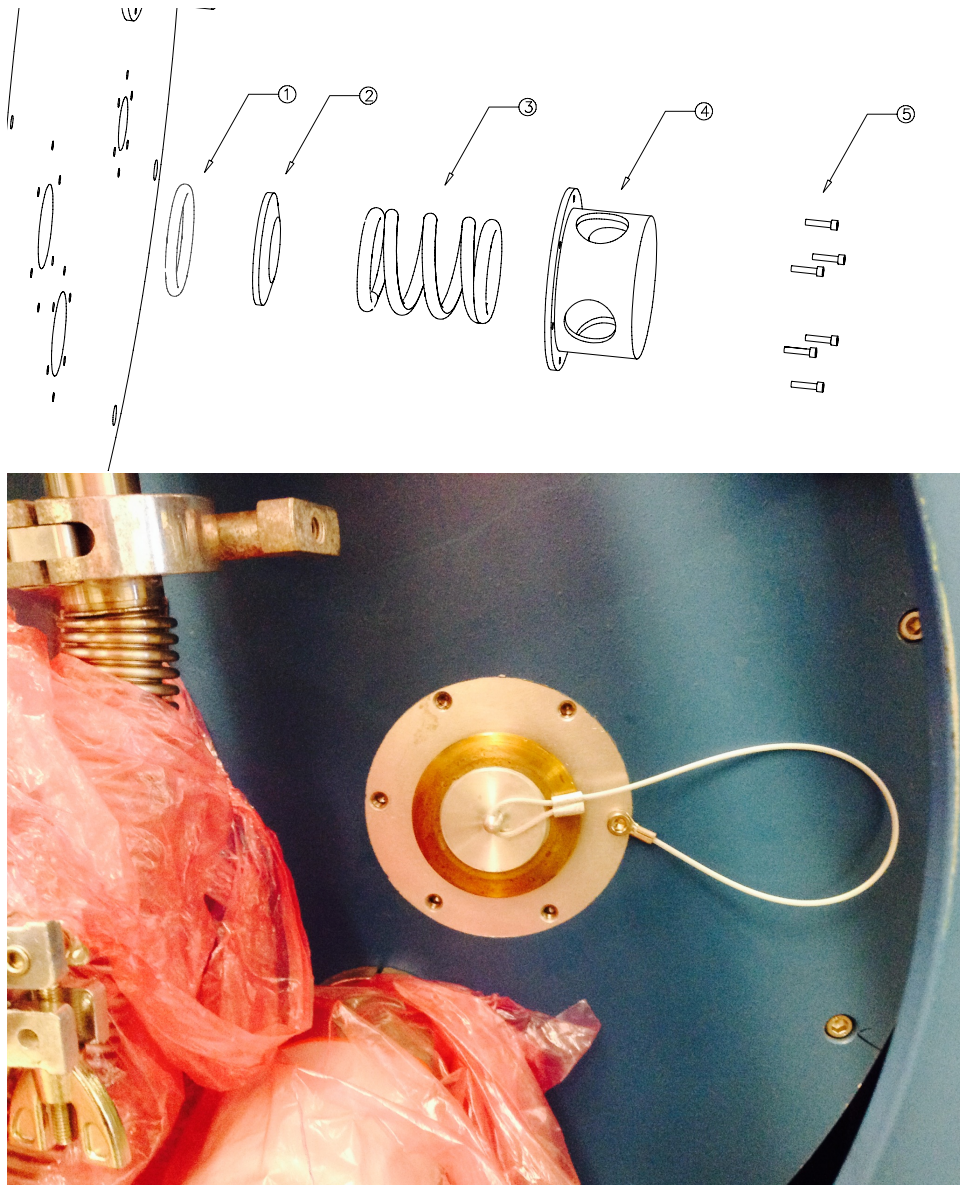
Top: An assembly drawing created by IR Lab Engineer, George Brims, illustrating the original ‘top hat’ housing for FLITECAM’s emergency cryostat vent valves. The component labels on the drawing refer to 1) o-ring, 2) blank flange, 3) spring, 4) ‘top hat’ housing, 5) six fasteners. Bottom: The new drop plate housing for FLITECAM’s emergency cryostat vent valves. This configuration includes an o-ring, blank flange, aluminum tether-attachment plate, coated stainless-steel tether, and one fastener.
